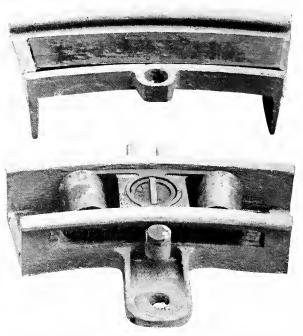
Susemihl Side Bearing for Freight Car Trucks, with Top Removed.
